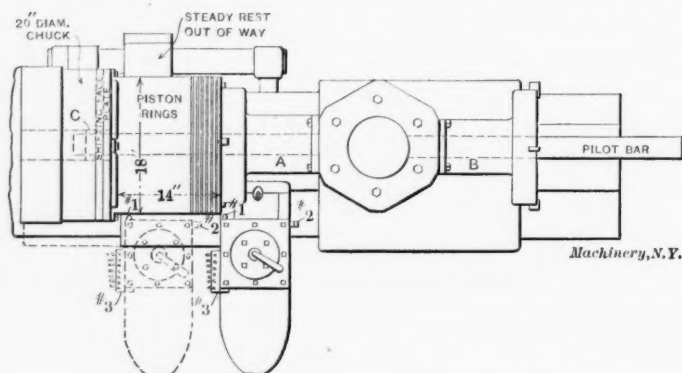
Making Piston Rings on the Libby Turret Lathe.
